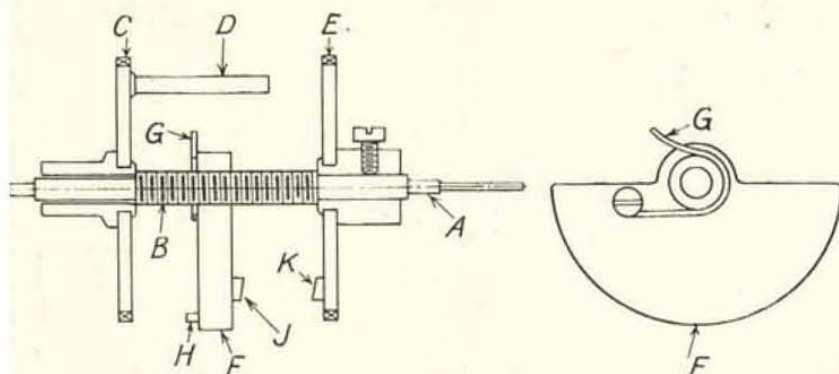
PRINCIPLE OF CONTROL OF WINDING.
